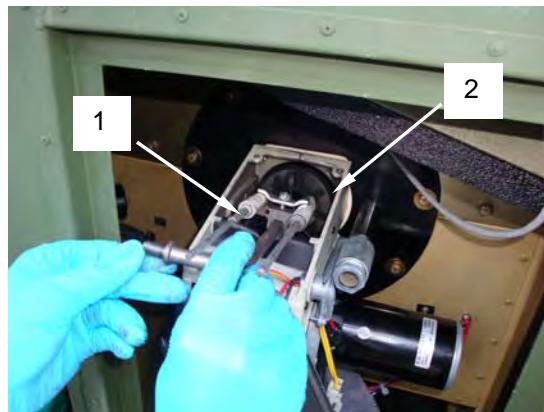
Installing the Nozzle Assembly in Housing Assembly.
